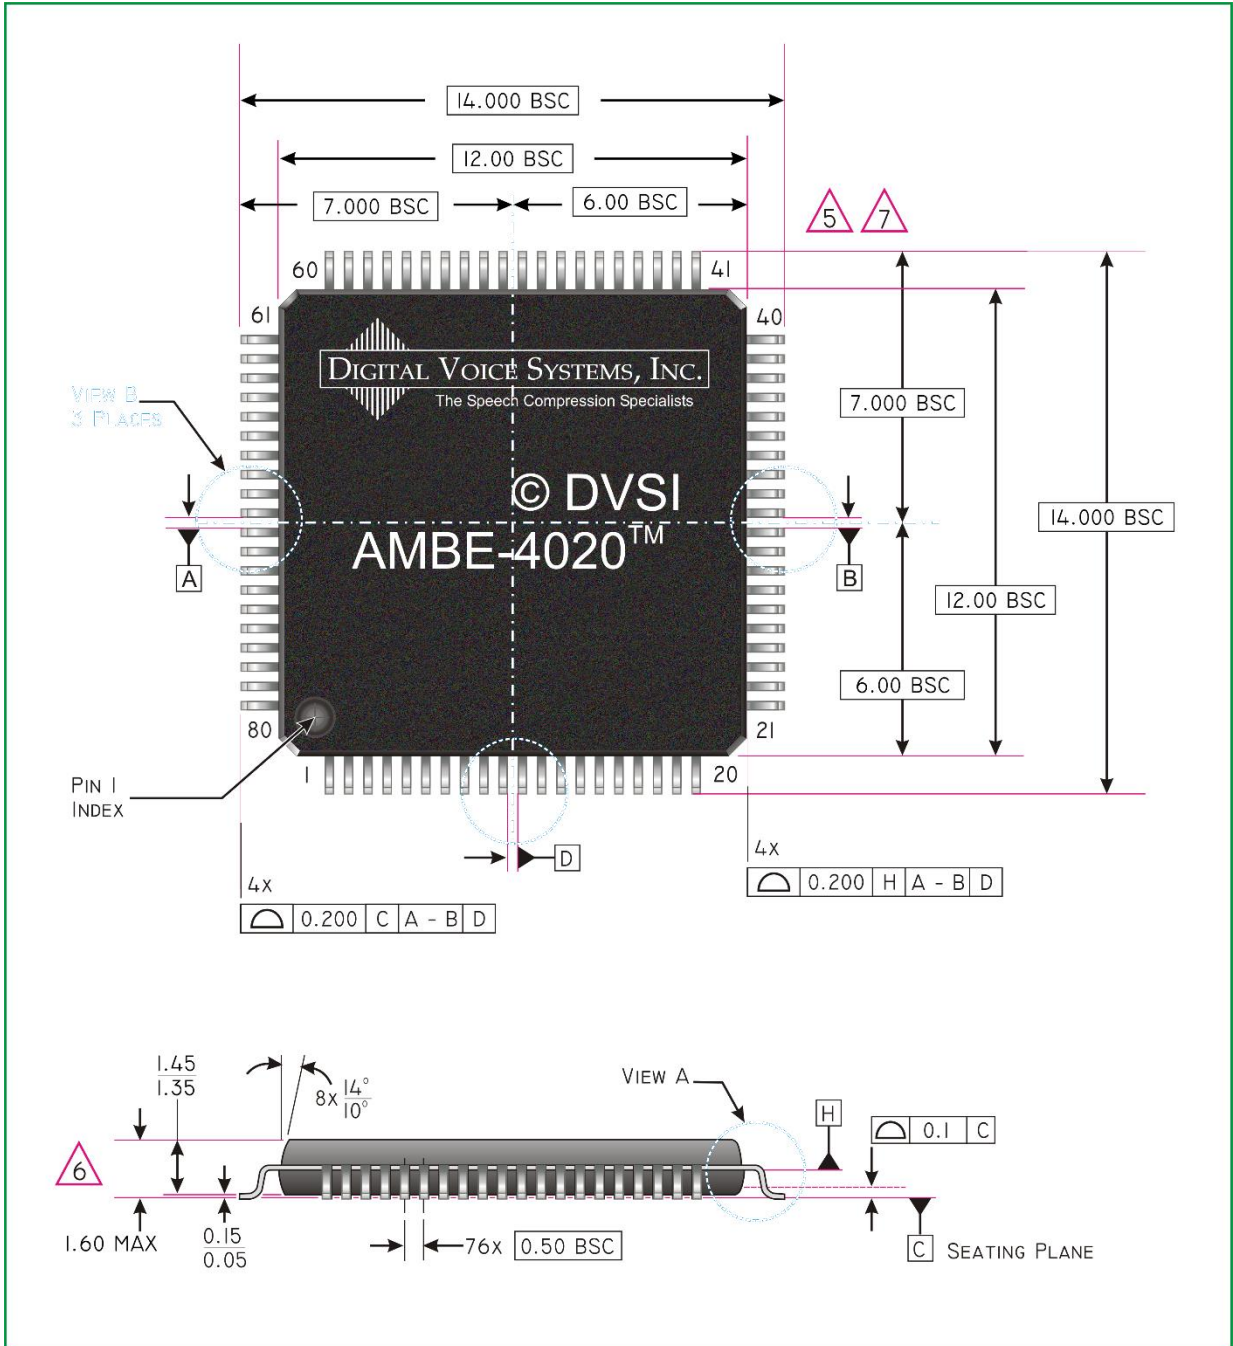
AMBE-4020™ LQFP 80-pin Low-Profile Quad Flat Pack Mechanical Details
